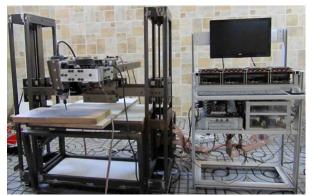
The fabricated MAAC connected to a built mechanical part of the CNC machine
